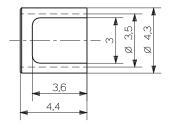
Spacer sleeve (Art. No. 3.050.262)
